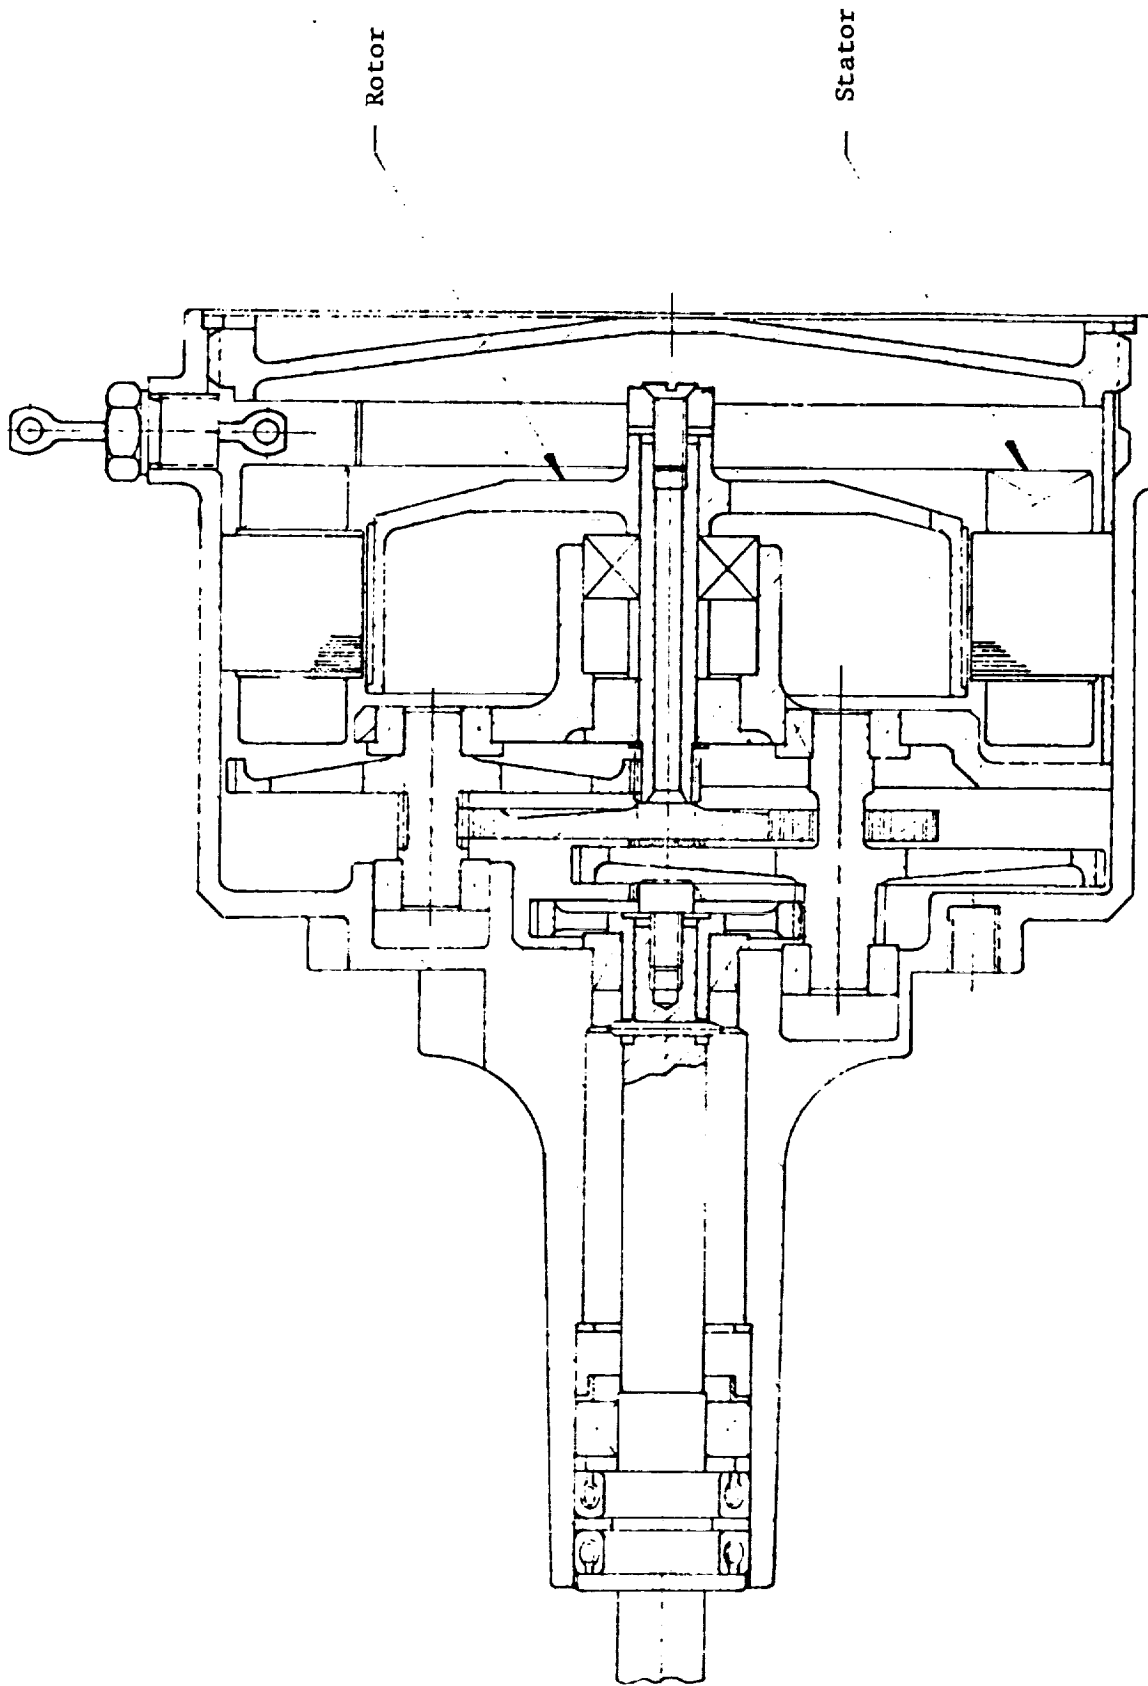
Multiple Hysteresis Synchronous Shaftless Motor with Integrated Gear Reduction
